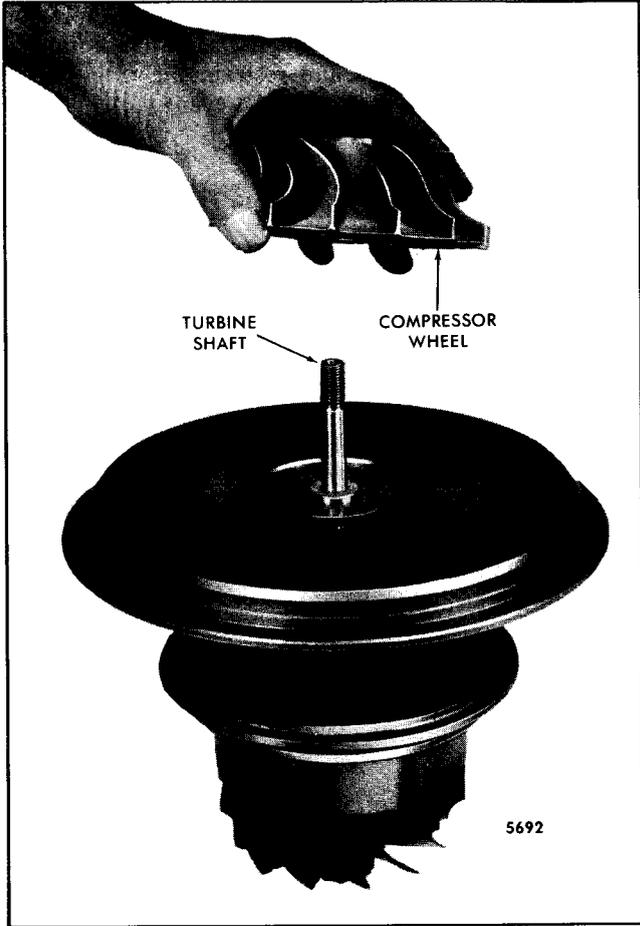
Removing Compressor Wheel from Turbine Shaft
